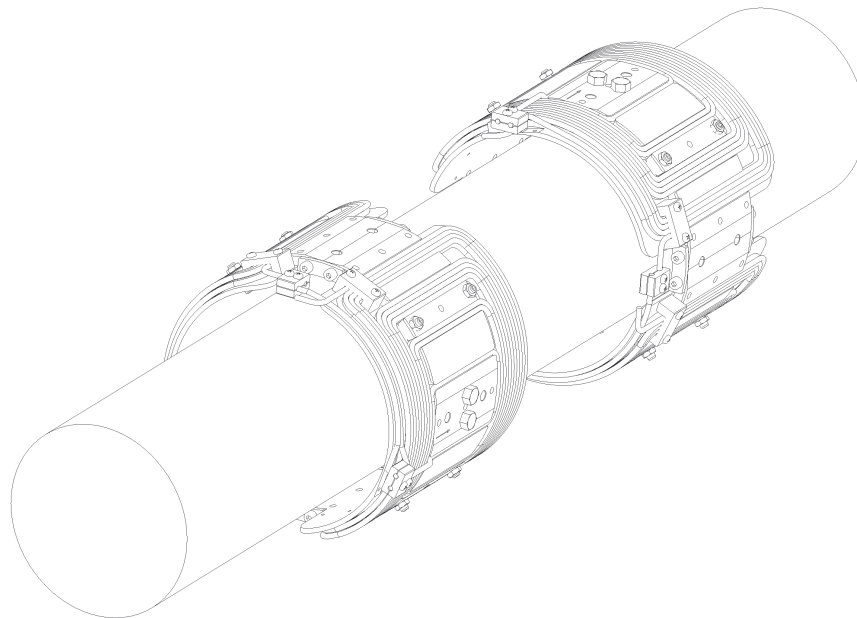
Sketch of a couple of Section Steering Magnets surrounding the accelerating section
